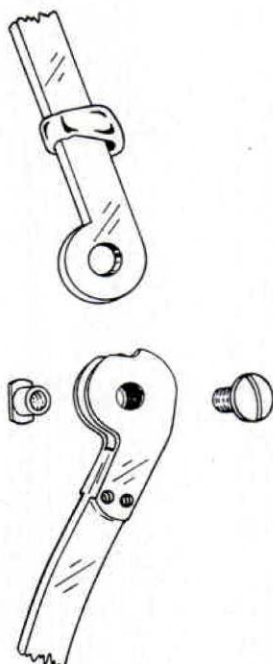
Free motion knee joint obtained by removing extension lock plate.
